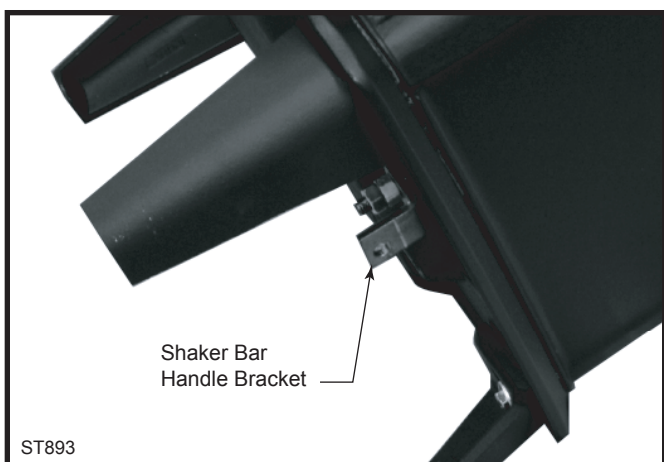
Attach shaker bar handle bracket to right hand side of base of stove.
